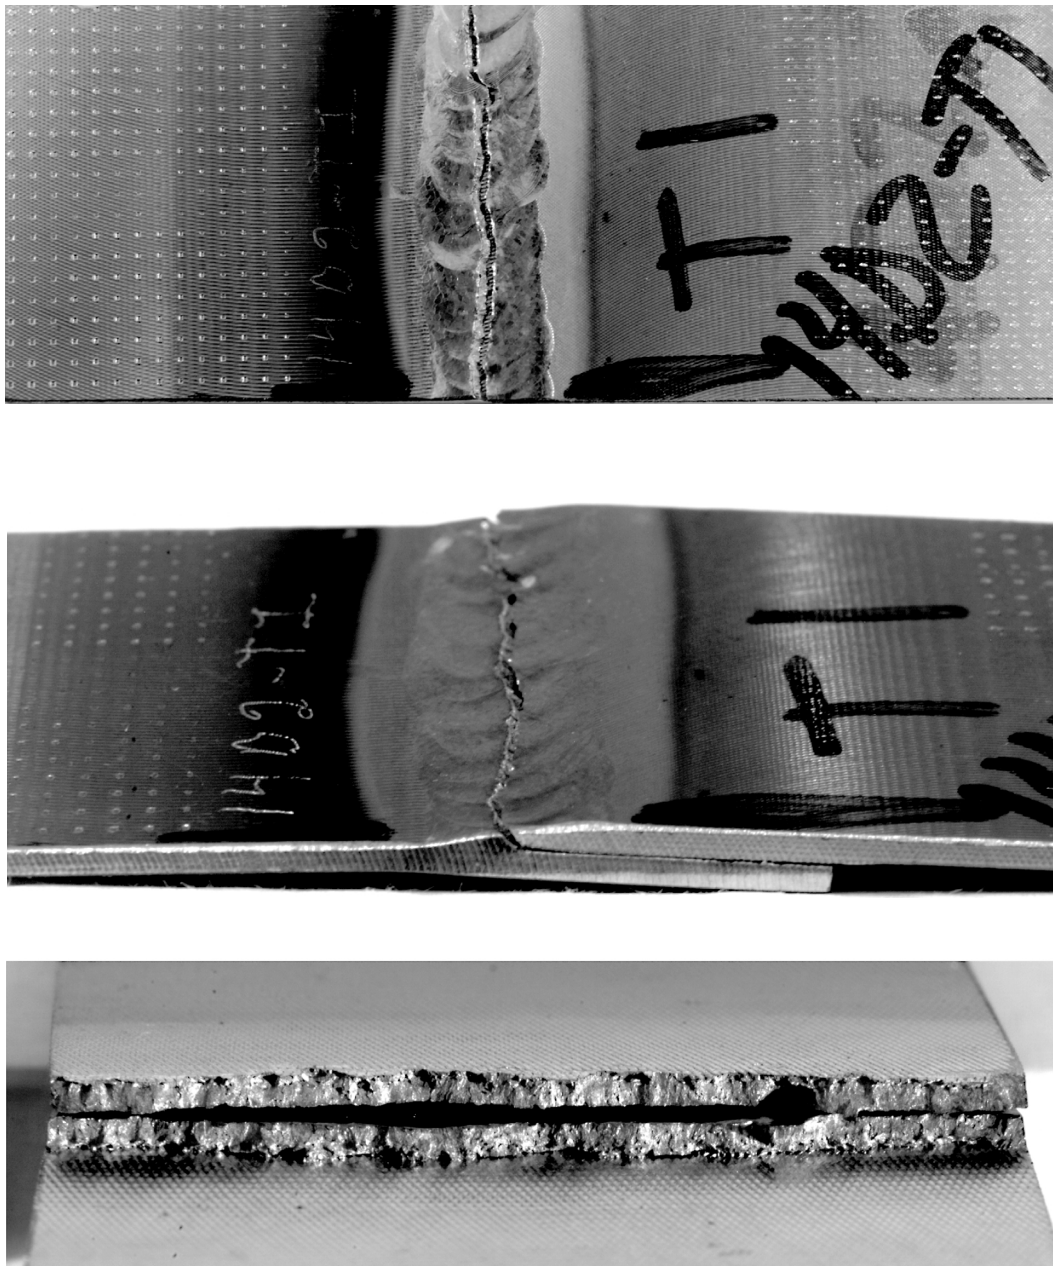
shows a lap fillet joint on 304 SS. It was one of the best samples tested, showing a clean fracture surface with no defects. It also showed some ductility from both the fracture surface and poor fit of the broken pieces.
